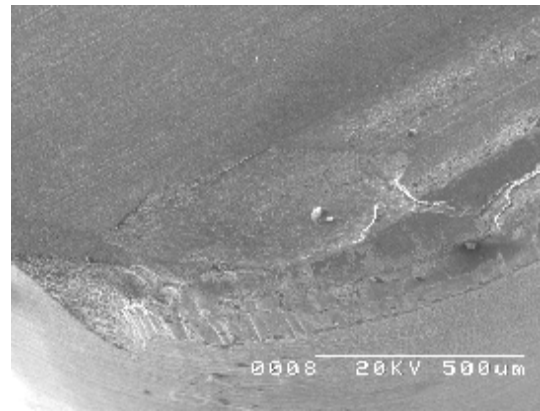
Wear generated after machining Inconel 718 with nano-ceramic T2 cutting tool showing micro-chipping and flaking of the cutting edge when machining at a cutting speed of 230 m/min and a feed rate of 0.15 mm/rev.
